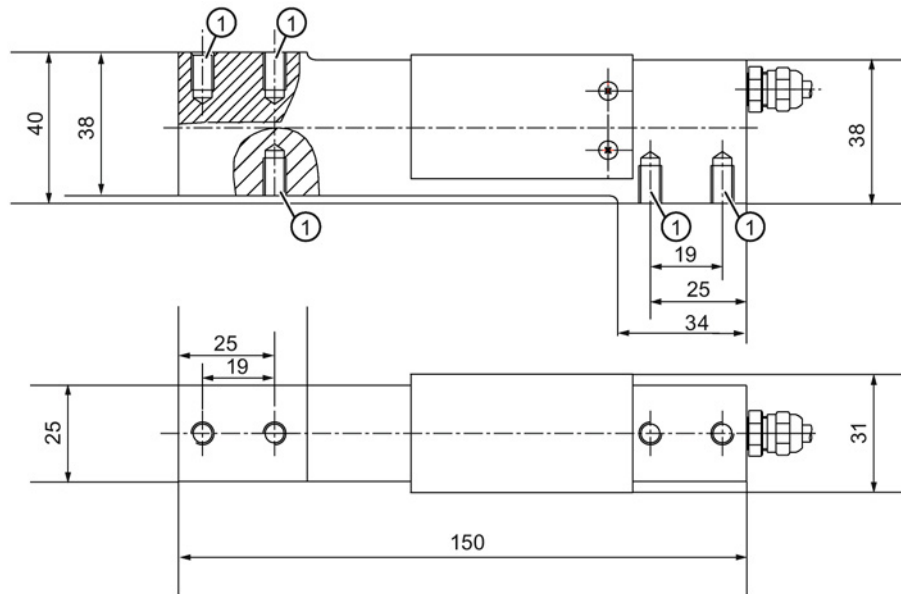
SIWAREX WL260 SP-S SA dimension drawing
